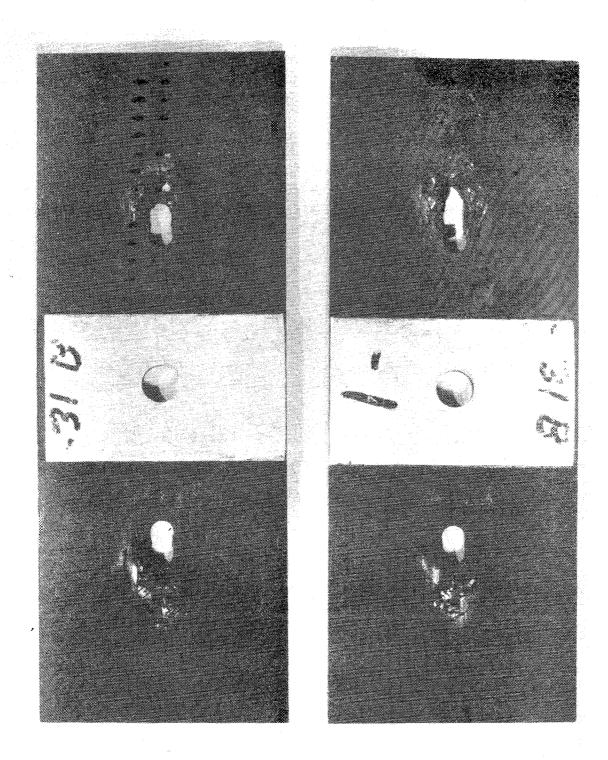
BEARING DAMAGE AT BOLT HOLES IN GRAPHITE - EPOXY COMPOSITES
